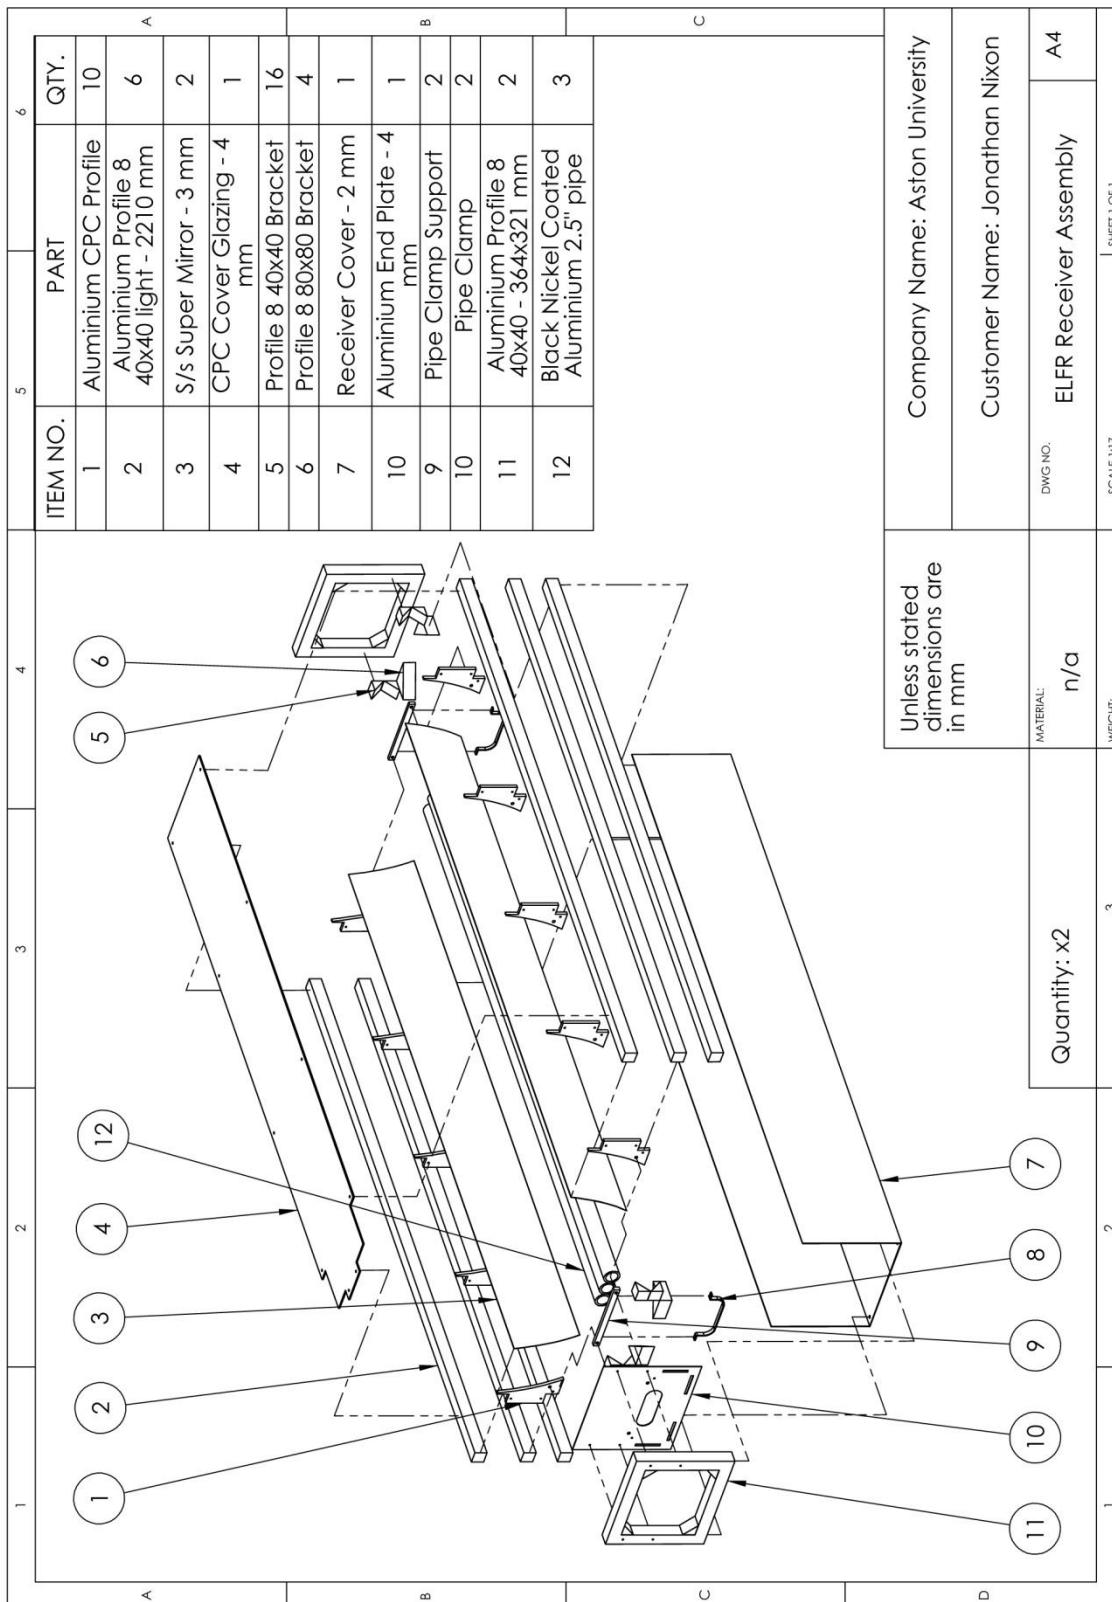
Exploded sub-assembly and BOM for the ELFR receiver assembly.
